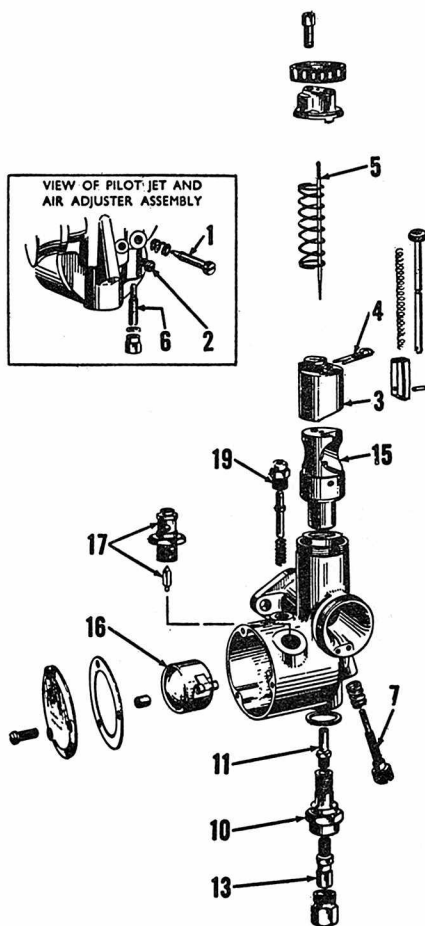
Exploded view of Amal carburetor typical of type used on 175cc models.
